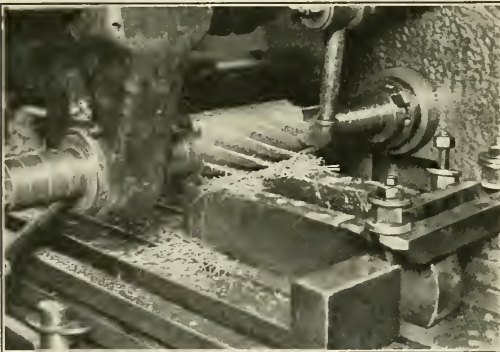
Modern Plain Knee Type Miller "Producing" a Valve Motion Lever
